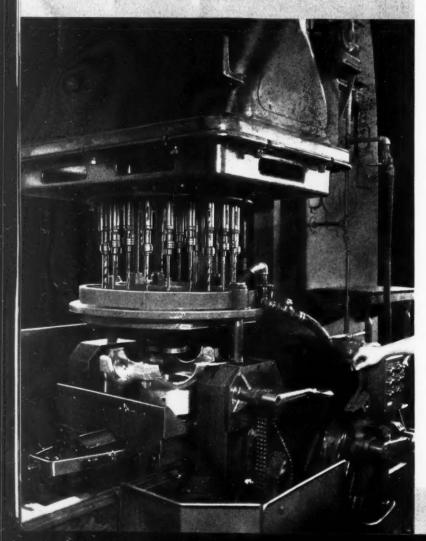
Mult-Au-Matics which have Greatly Speeded up Production in the Manufacture of Airplane-engine Reduction Gears
